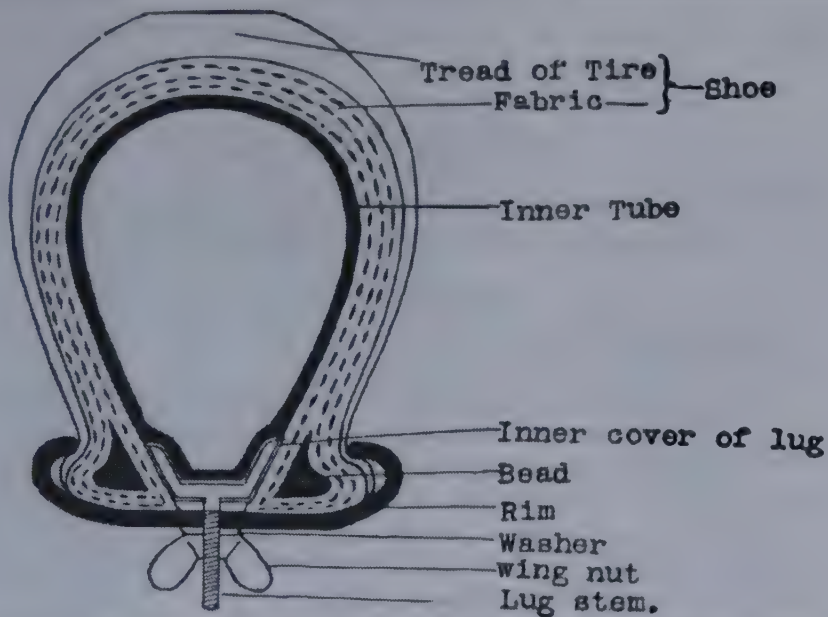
A Standard Double Tube Pneumatic Tire Mounted on a "Clincher" Rim. This tire could also be mounted on a Standard Universal Quick Detachable Rim as shown in Fig. 1, Chart 139.
